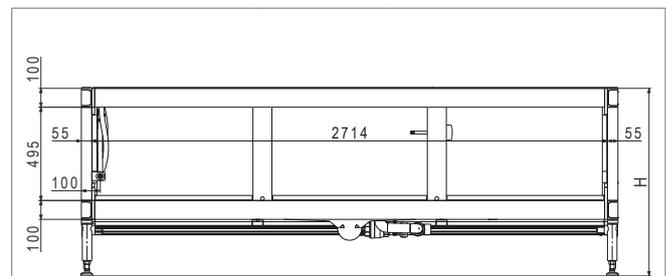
Dimensional drawing for exhaust air duct (dimensions in mm)
